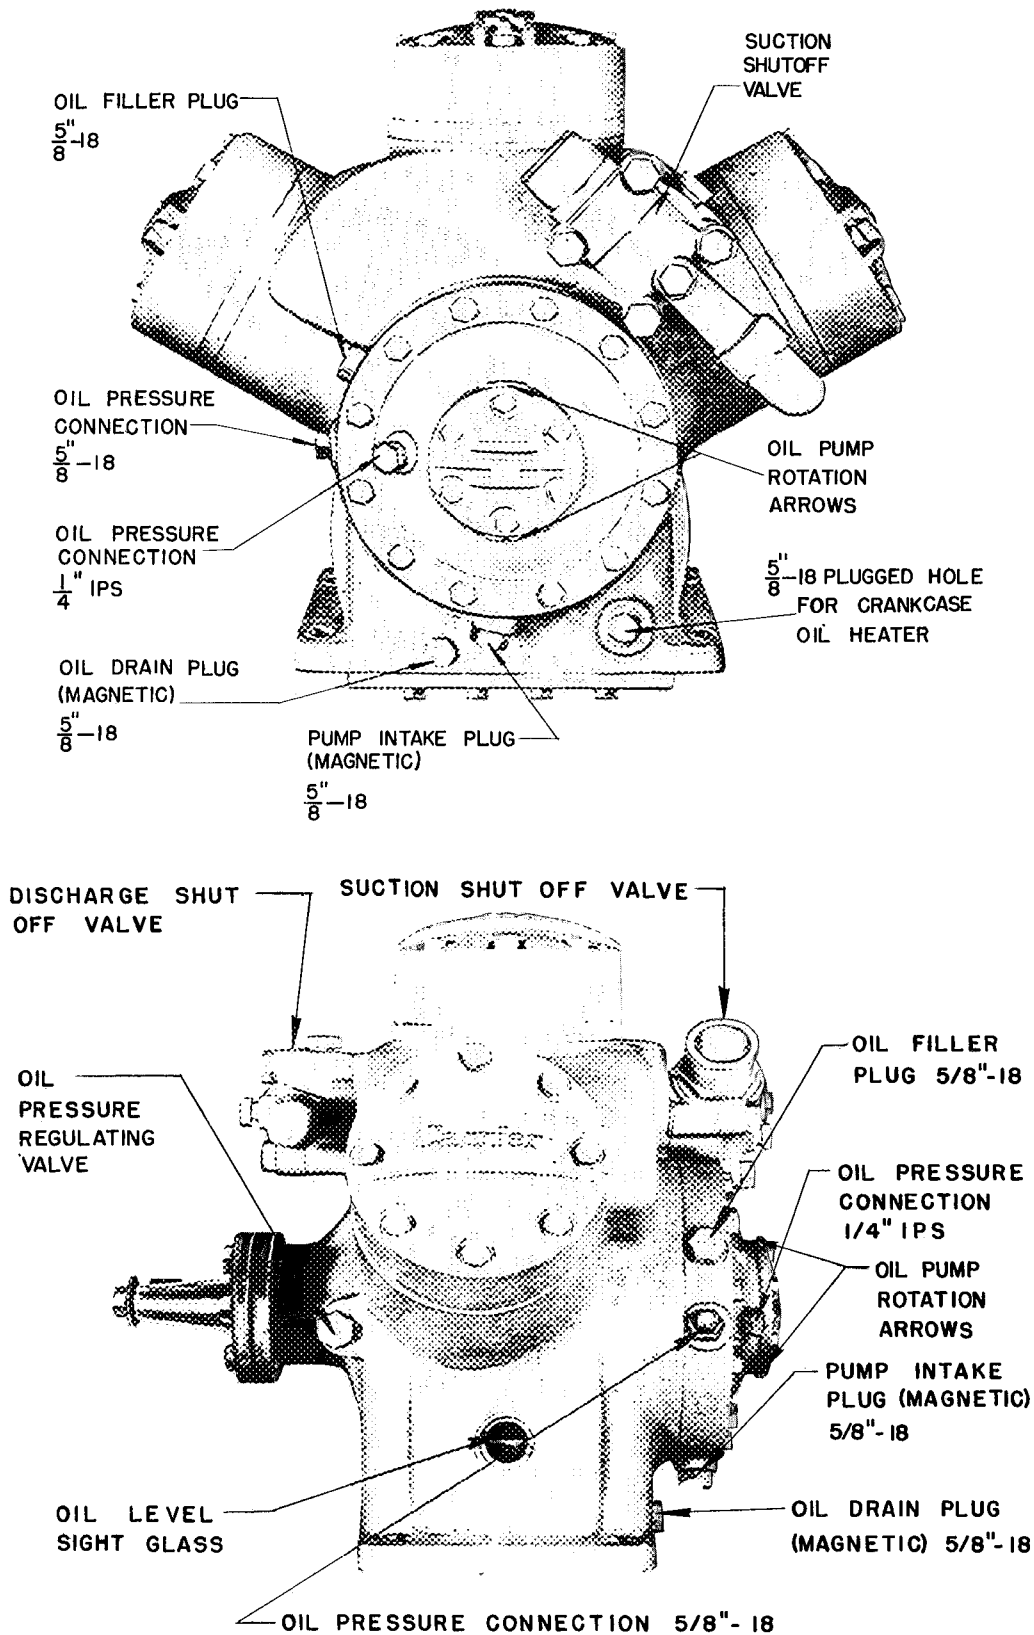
5F30 COMPRESSOR (SIDE AND PUMP END VIEW)
